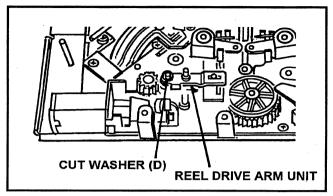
Removal of Reel Drive Arm Unit
